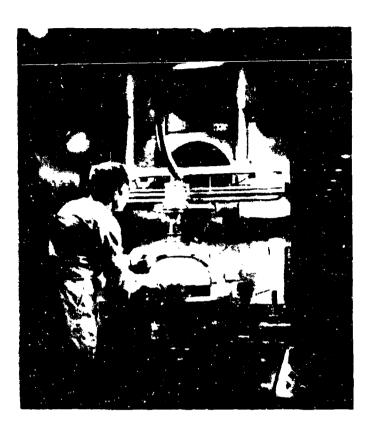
Titanium Bulkhead Subassembly Welding
